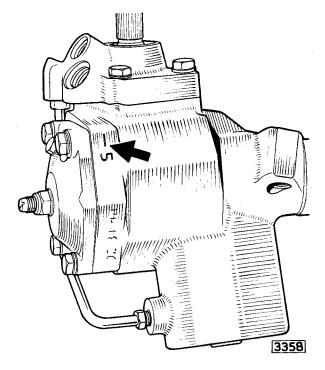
Location of the depth reading to facilitate the fitting of the valve shaft shims
